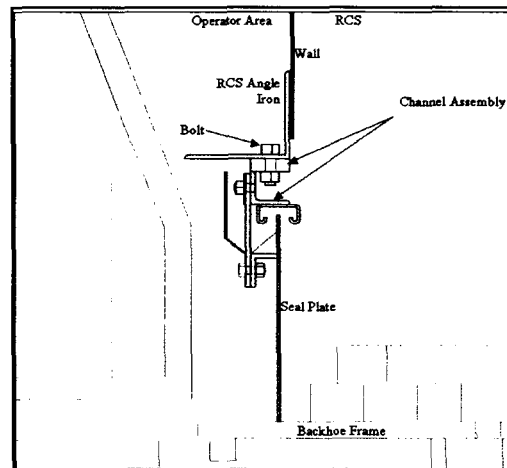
Bolt RCS Angle Iron to the Channel Assembly
